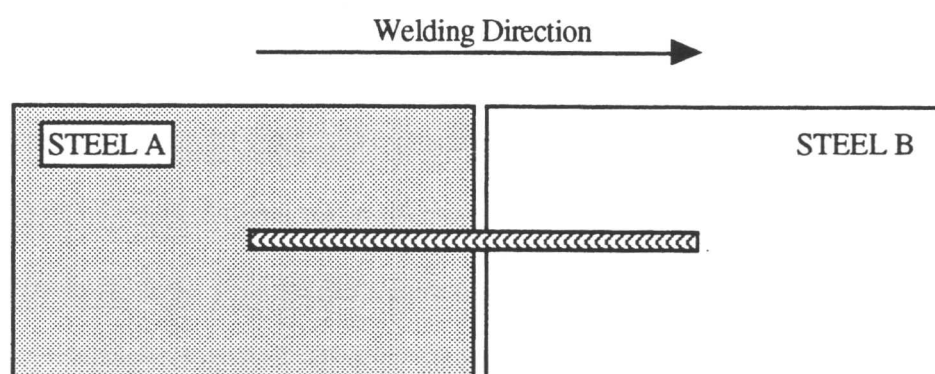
Schematic illustration of butt weld across dissimilar metal junction.
